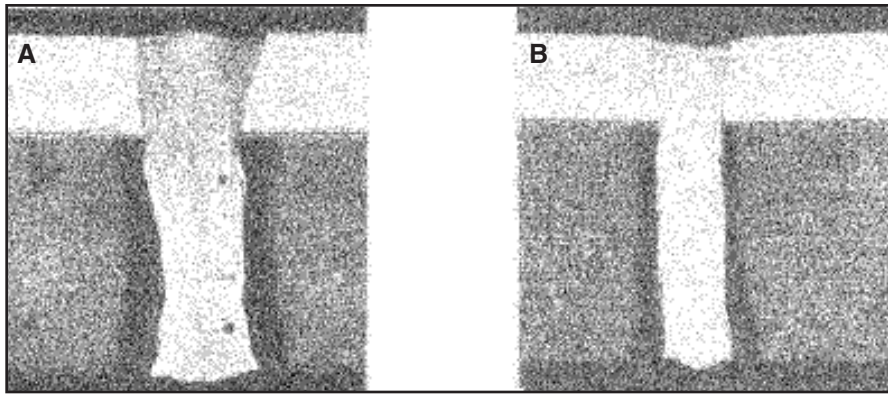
Macrographs of welded sections: A — dual LBW; B — single-side LBW.
